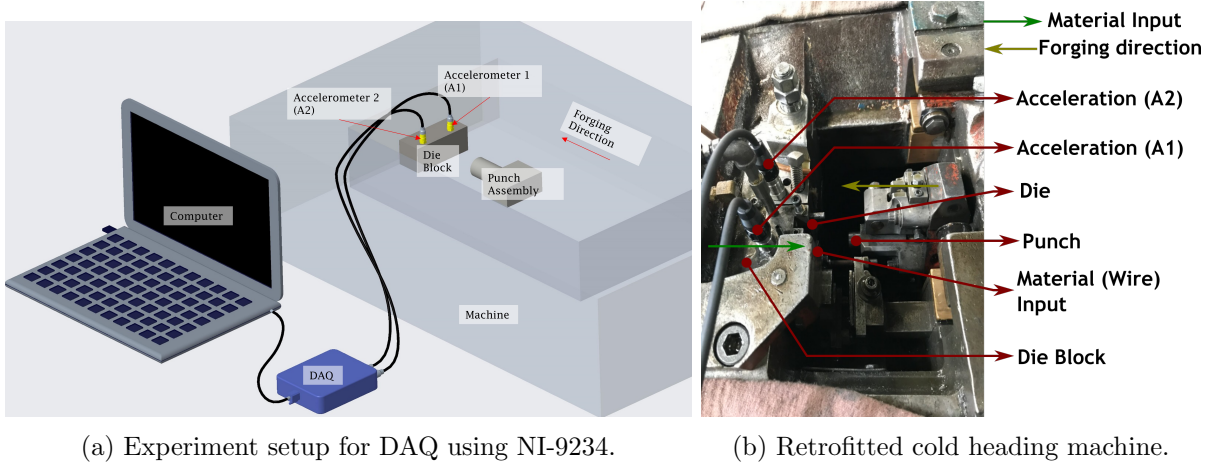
Retrofitting a cold heading machine for DAQ.
